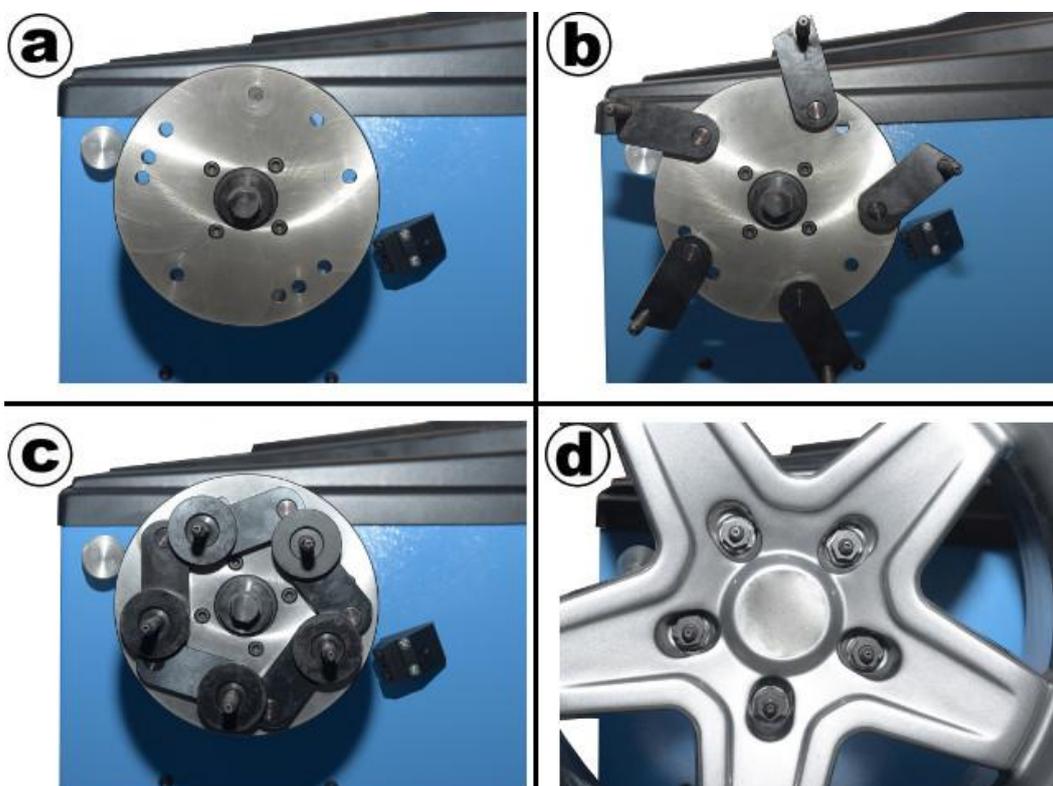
Mounting a wheel without a central hole on the spike holder.
